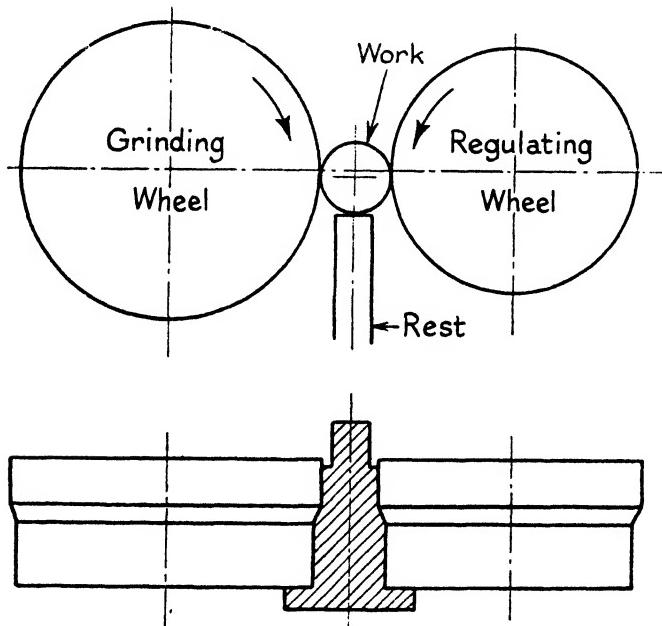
PRINCIPLE OF CENTRELESS GRINDING WITH FORMED WHEELS
